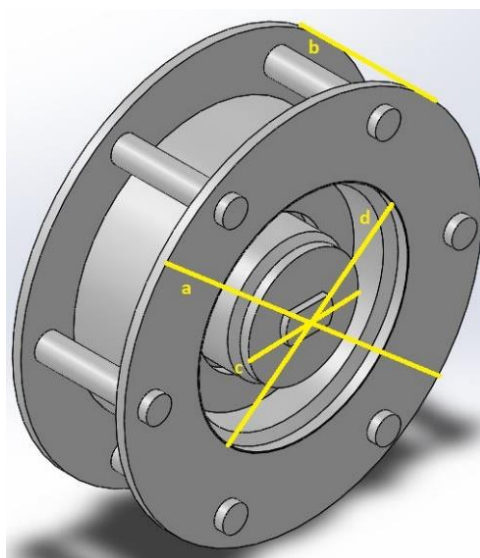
Perspective View of the Mechanical Drawing of the ISCT200-US Thruster
